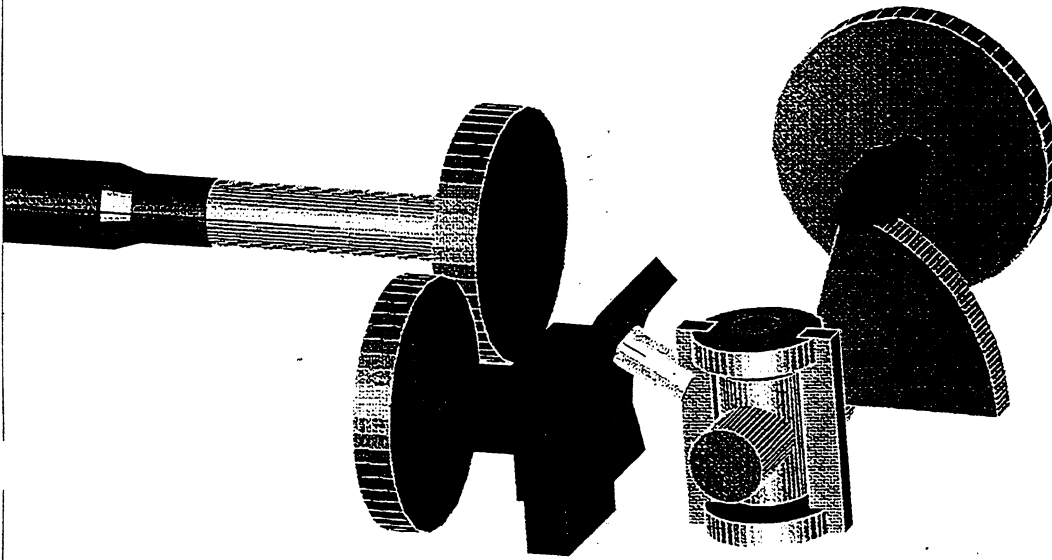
Spatial Crank Gear of a Rapiert Weaving Machine
